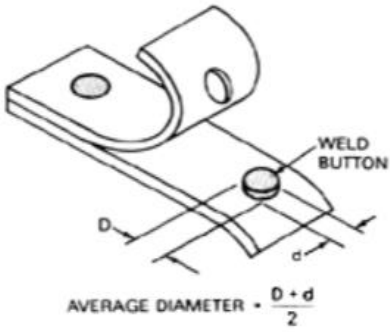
The peel test to check the size of the weld button . [21]
